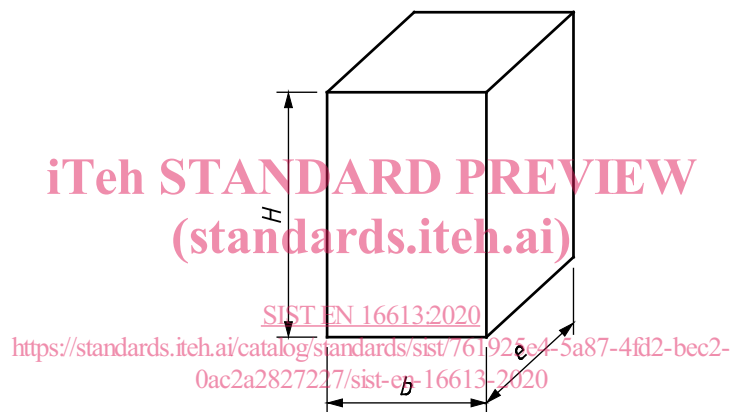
Dimensions of the isotropic interlayer test piece used for tensile test
